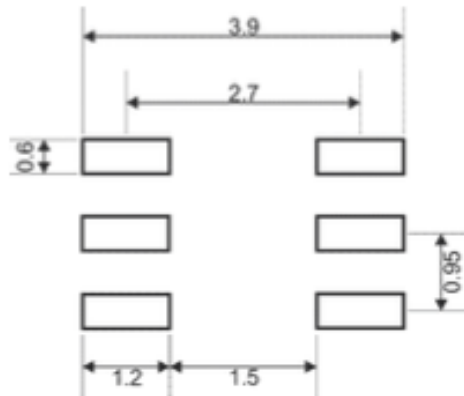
Recommended solder pad layout. All dimensions are in millimeters. Note the drawing is not to scale. Dimensions are inclusive of plating.
